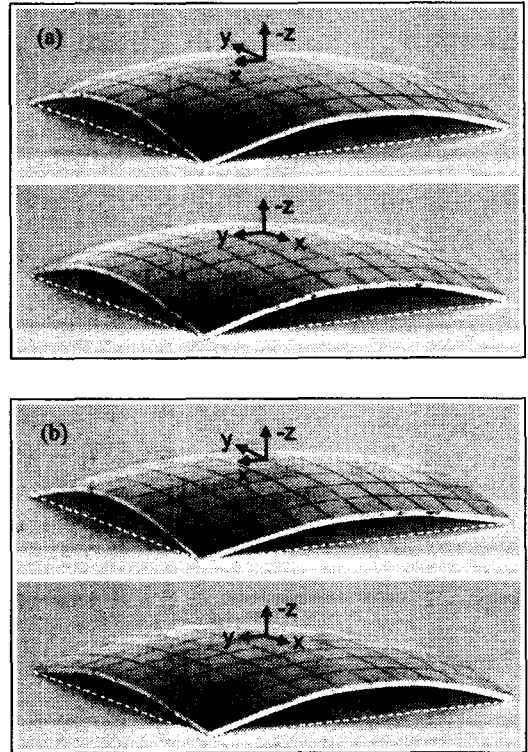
Formed workpieces; (a) Exp. 1B and (b) Exp. 2B
